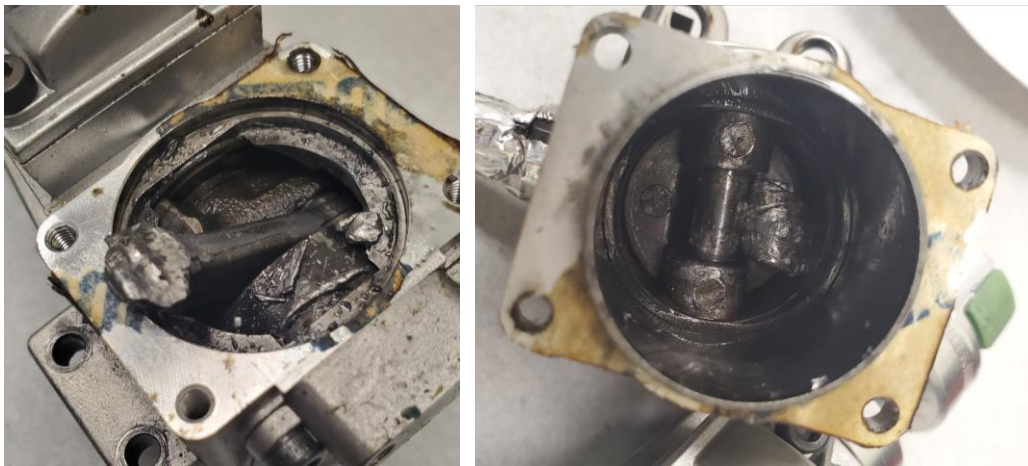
Engine failure: broken connecting rod in crankcase (left), and detached piston head (right)
